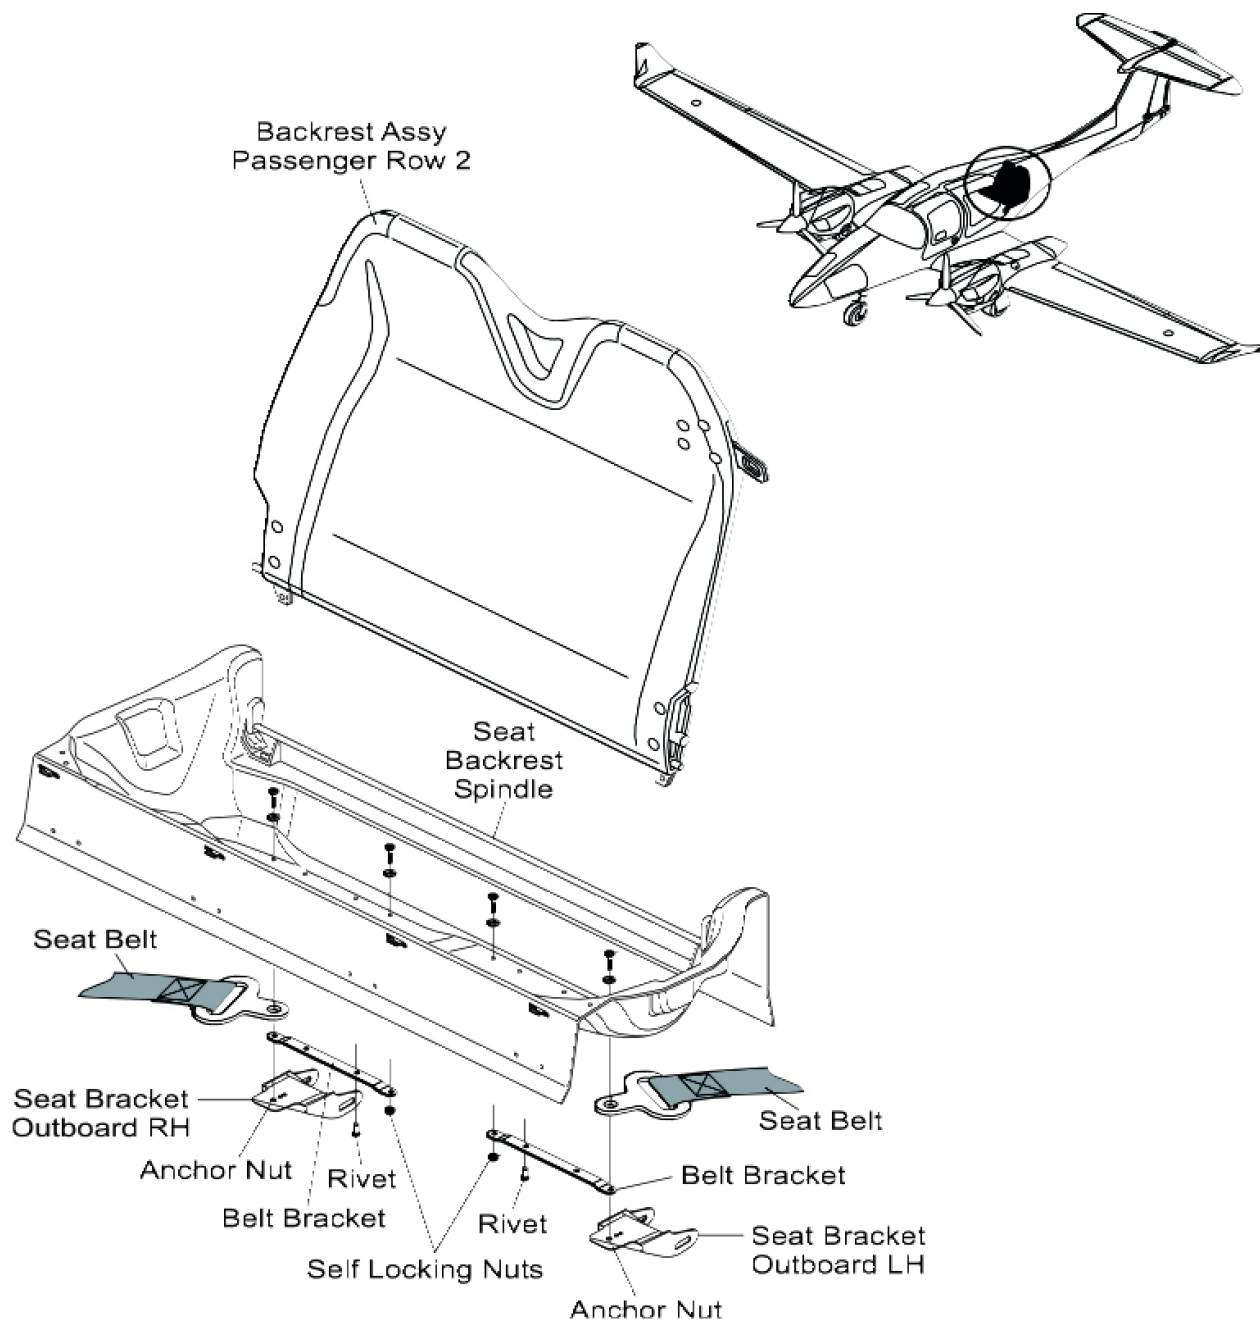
Passenger Seat Installation - Row 2 (if OÄM 62-019 is installed)
